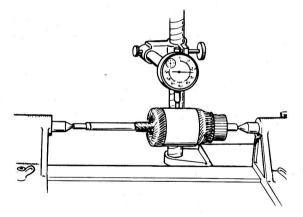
CHECKING ARMATURE SHAFT RUNOUT
